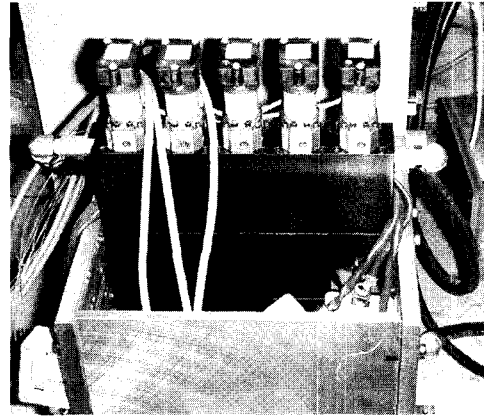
Multi-point elastomer forming apparatus with 5×1 punch array
